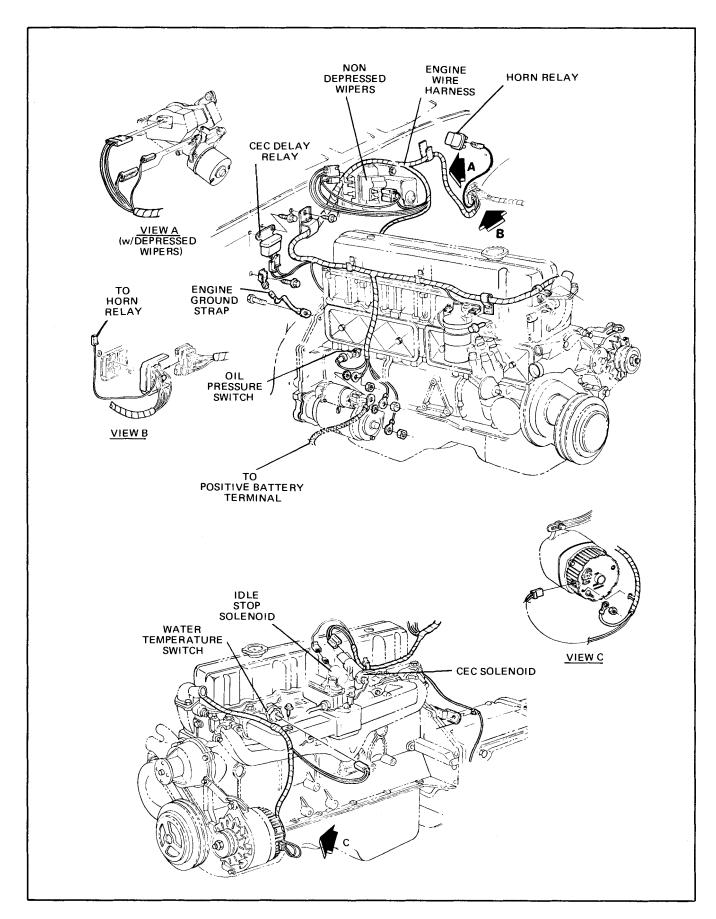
F Series (L-6) Engine Wire Harness Installation
